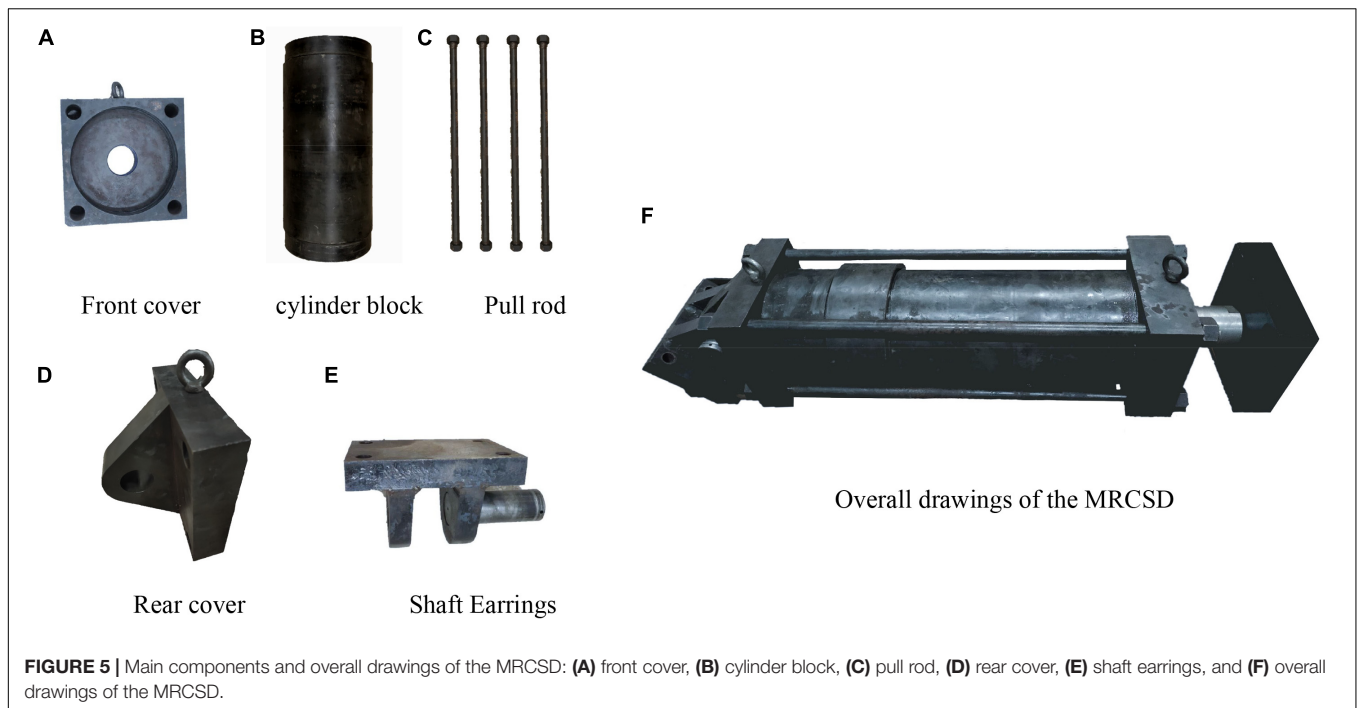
| Main components and overall drawings of the MRCSD: (A) front cover, (B) cylinder block, (C) pull rod, (D) rear cover, (E) shaft earrings, and (F) overall drawings of the MRCSD.
